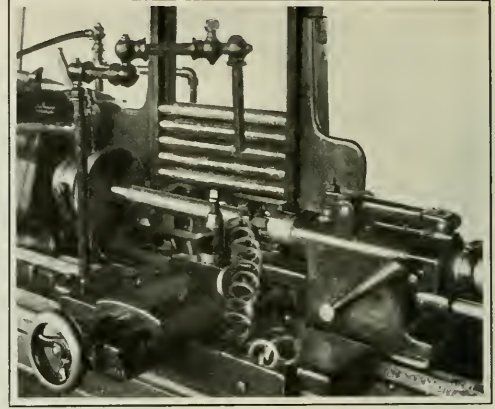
Automatic Lathe engaged in taking a Heavy Cut on Work mounted on the Centers
